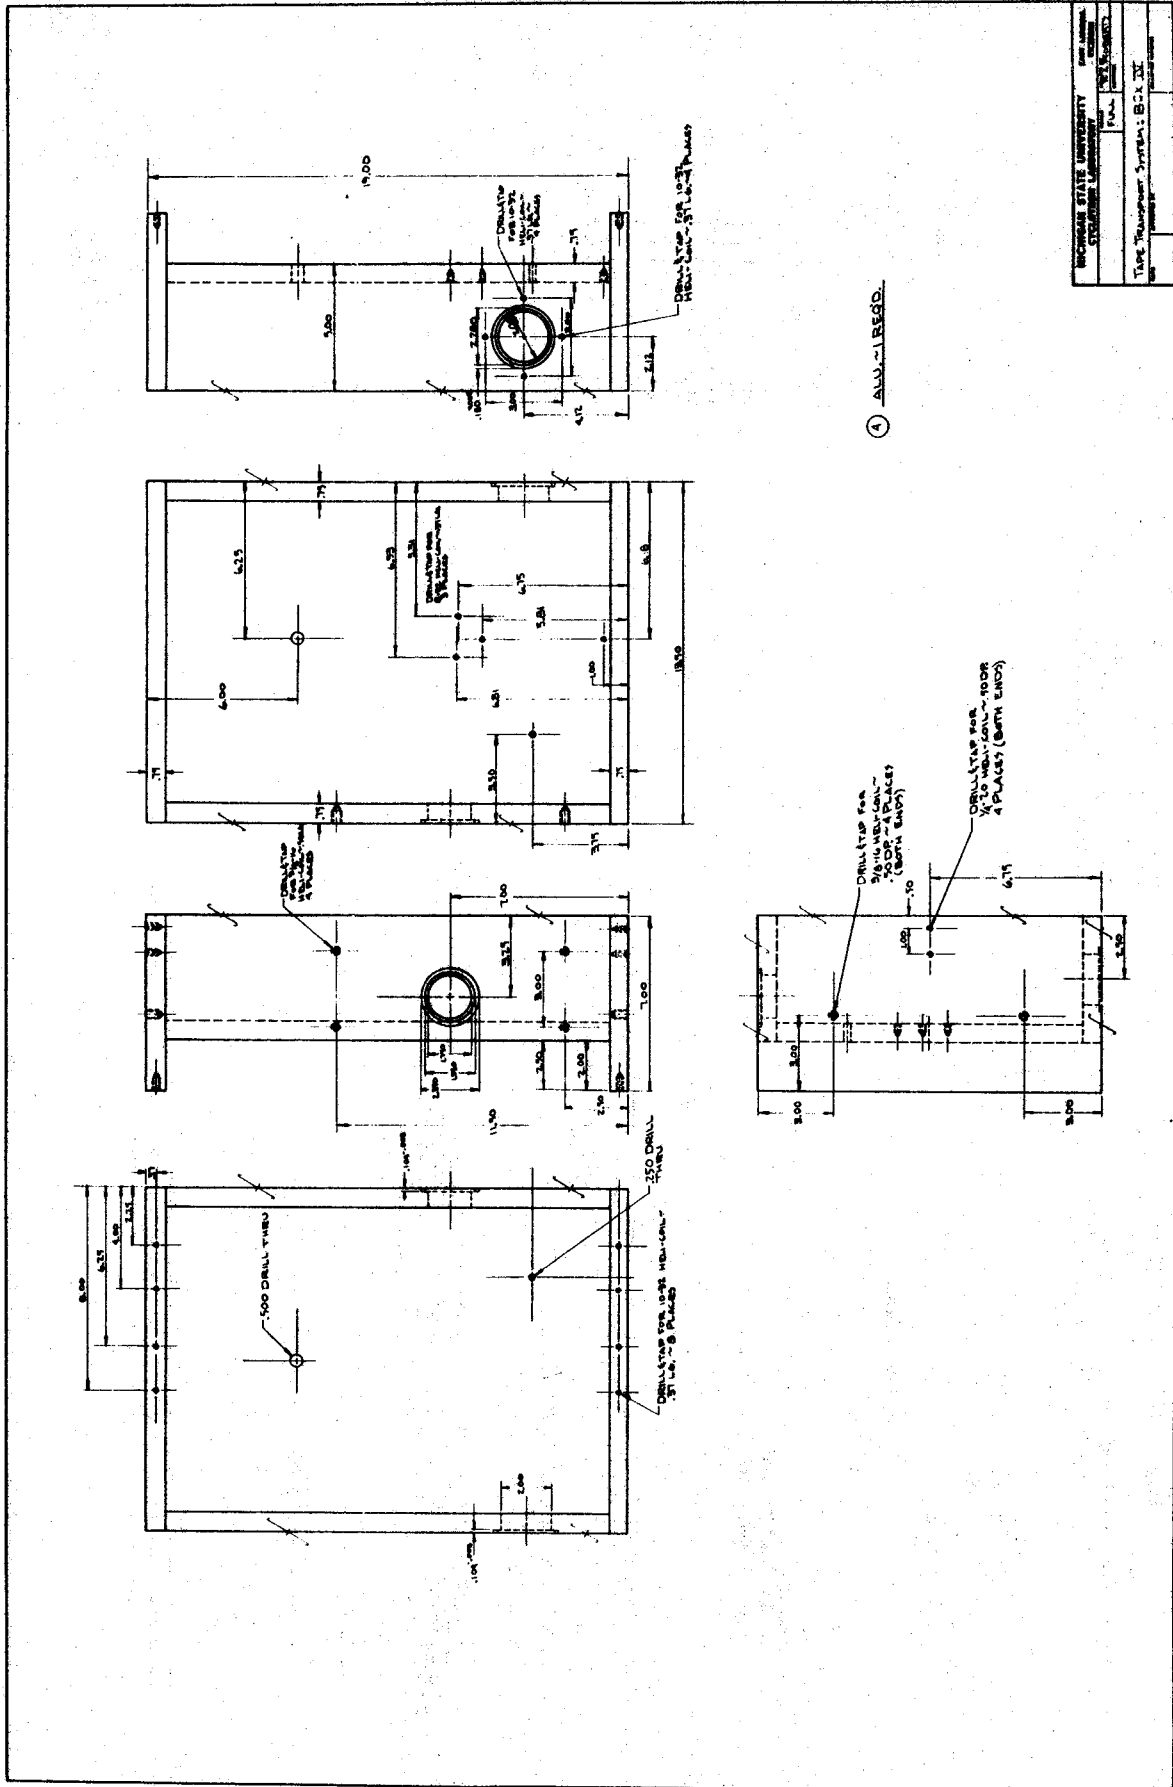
Detail Drawing of Tape Transport System, Box IV.
